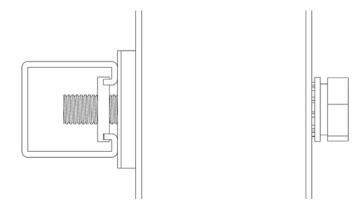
Side rail to frame assembly with spacer and shim placement shown, when applicable (Refer to Support Rail Assembly)
